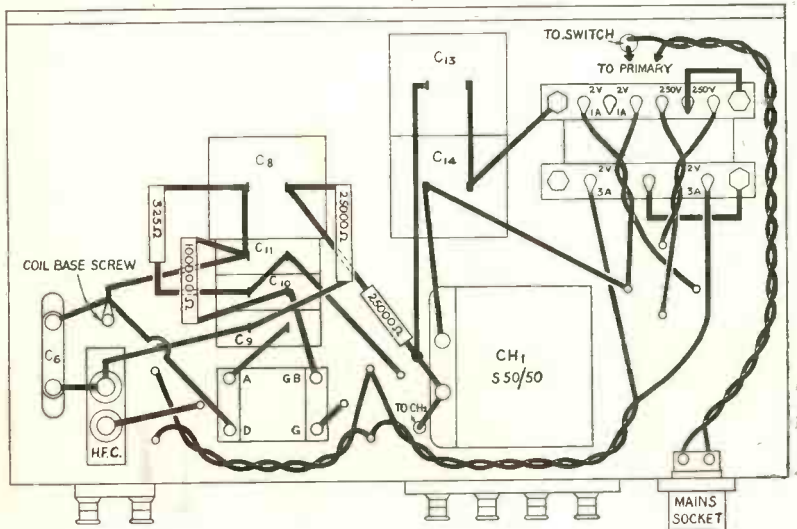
THE LAYOUT AND WIRING OF THE UNDERNEATH.
